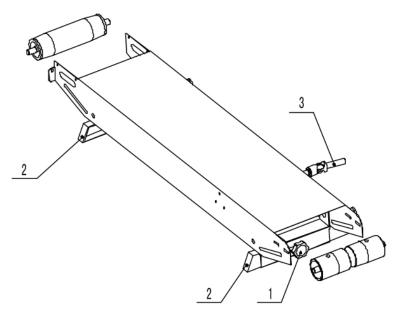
(1) Adjusting Knob, (2) Foot Rest, (3) Drive Shaft Connector, Gimbal Assembly
